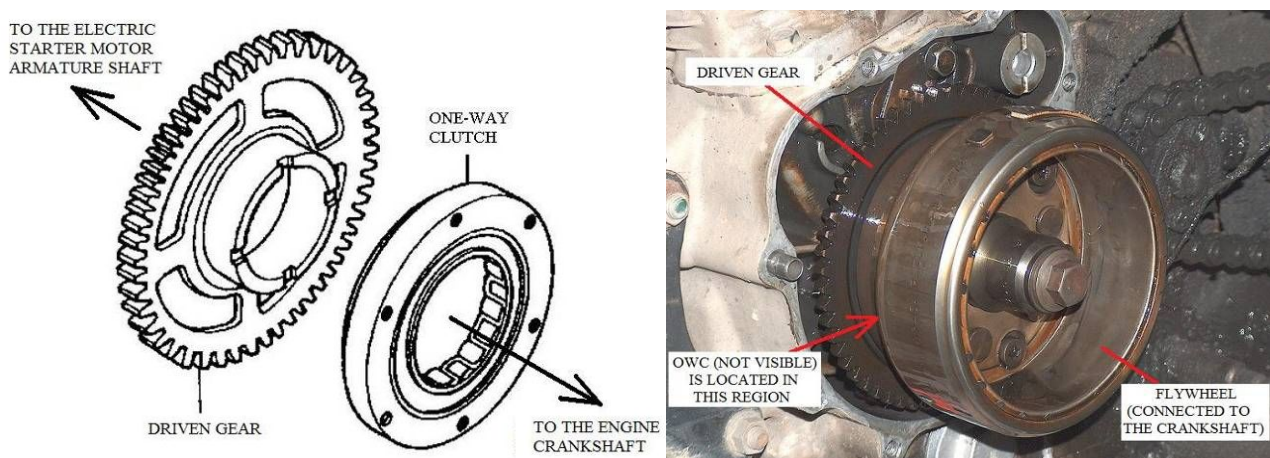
The One-Way Clutch, the driven gear and typical configuration of the motorcycle engine starter.
